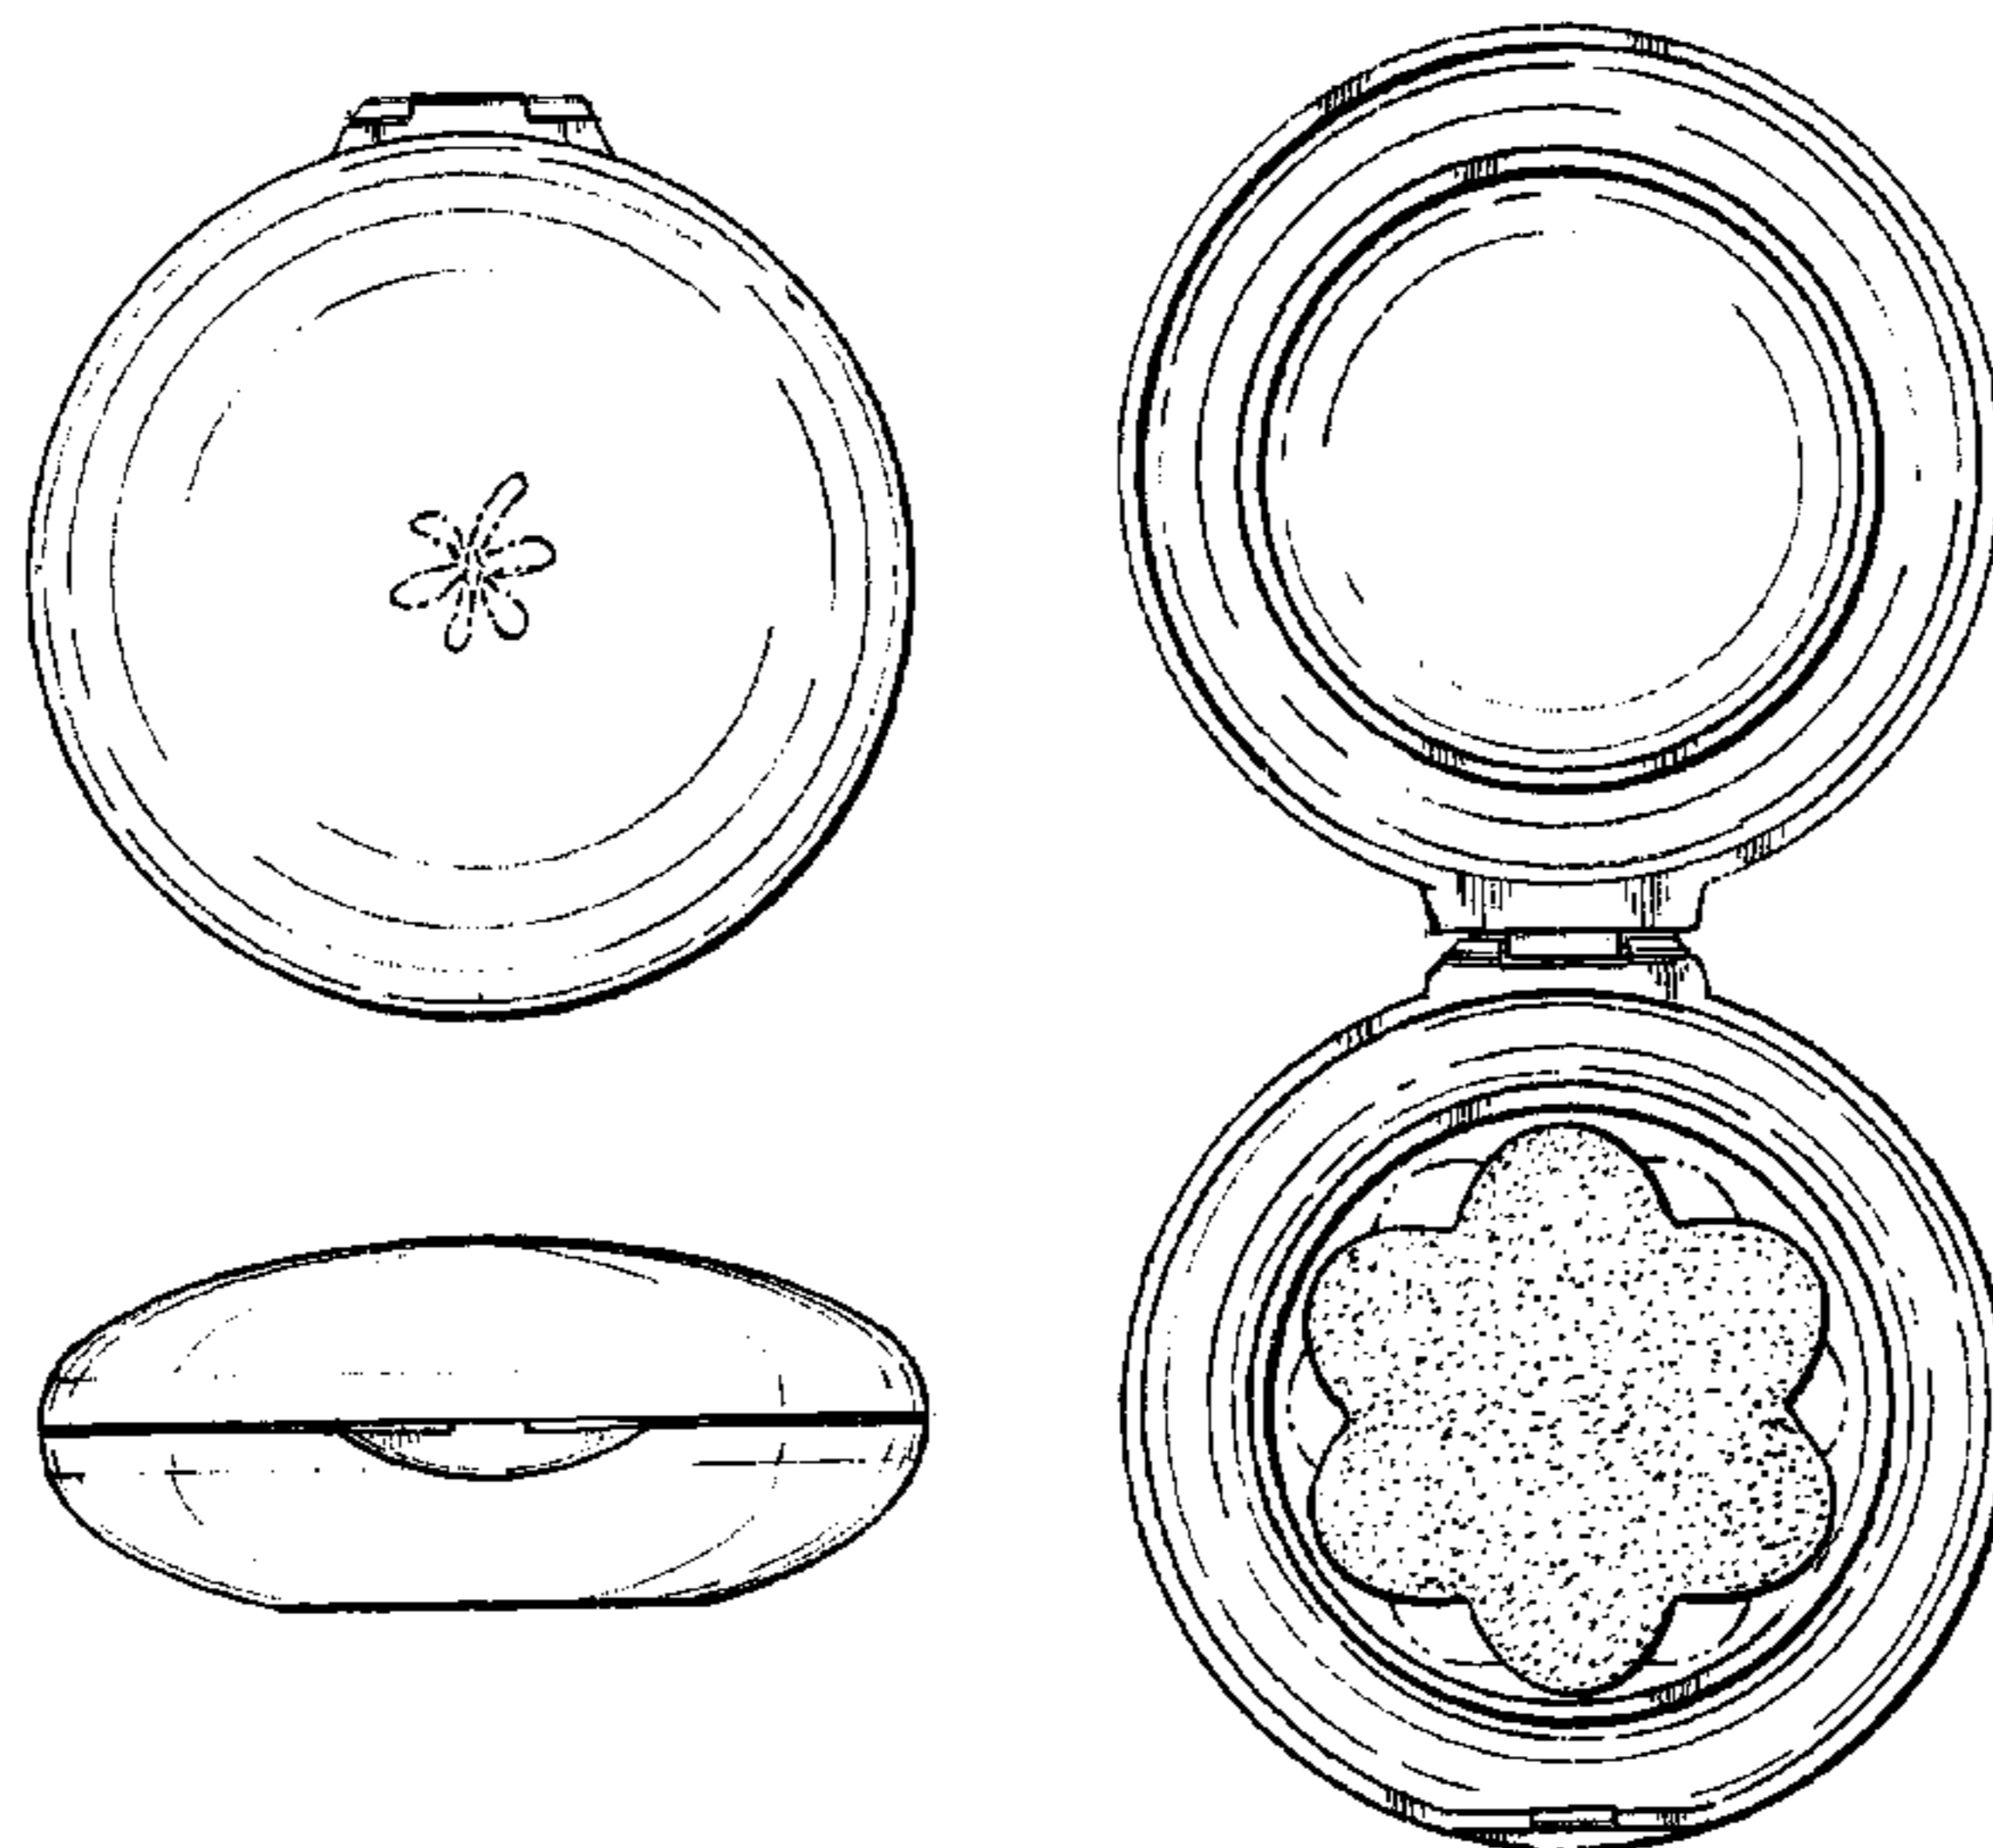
is a front elevation view of the combined fragrance emitting patch and compact shown in FIG. 1 showing the compact in an open configuration;
